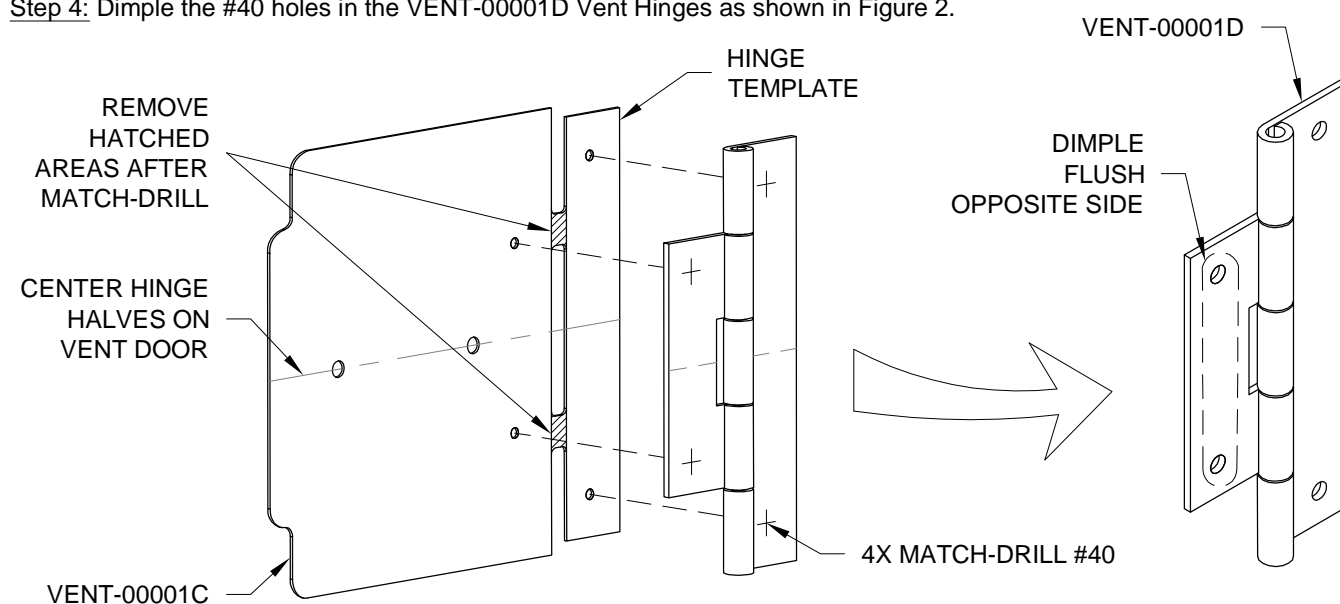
MATCH-DRILL & DIMPLE HINGES
